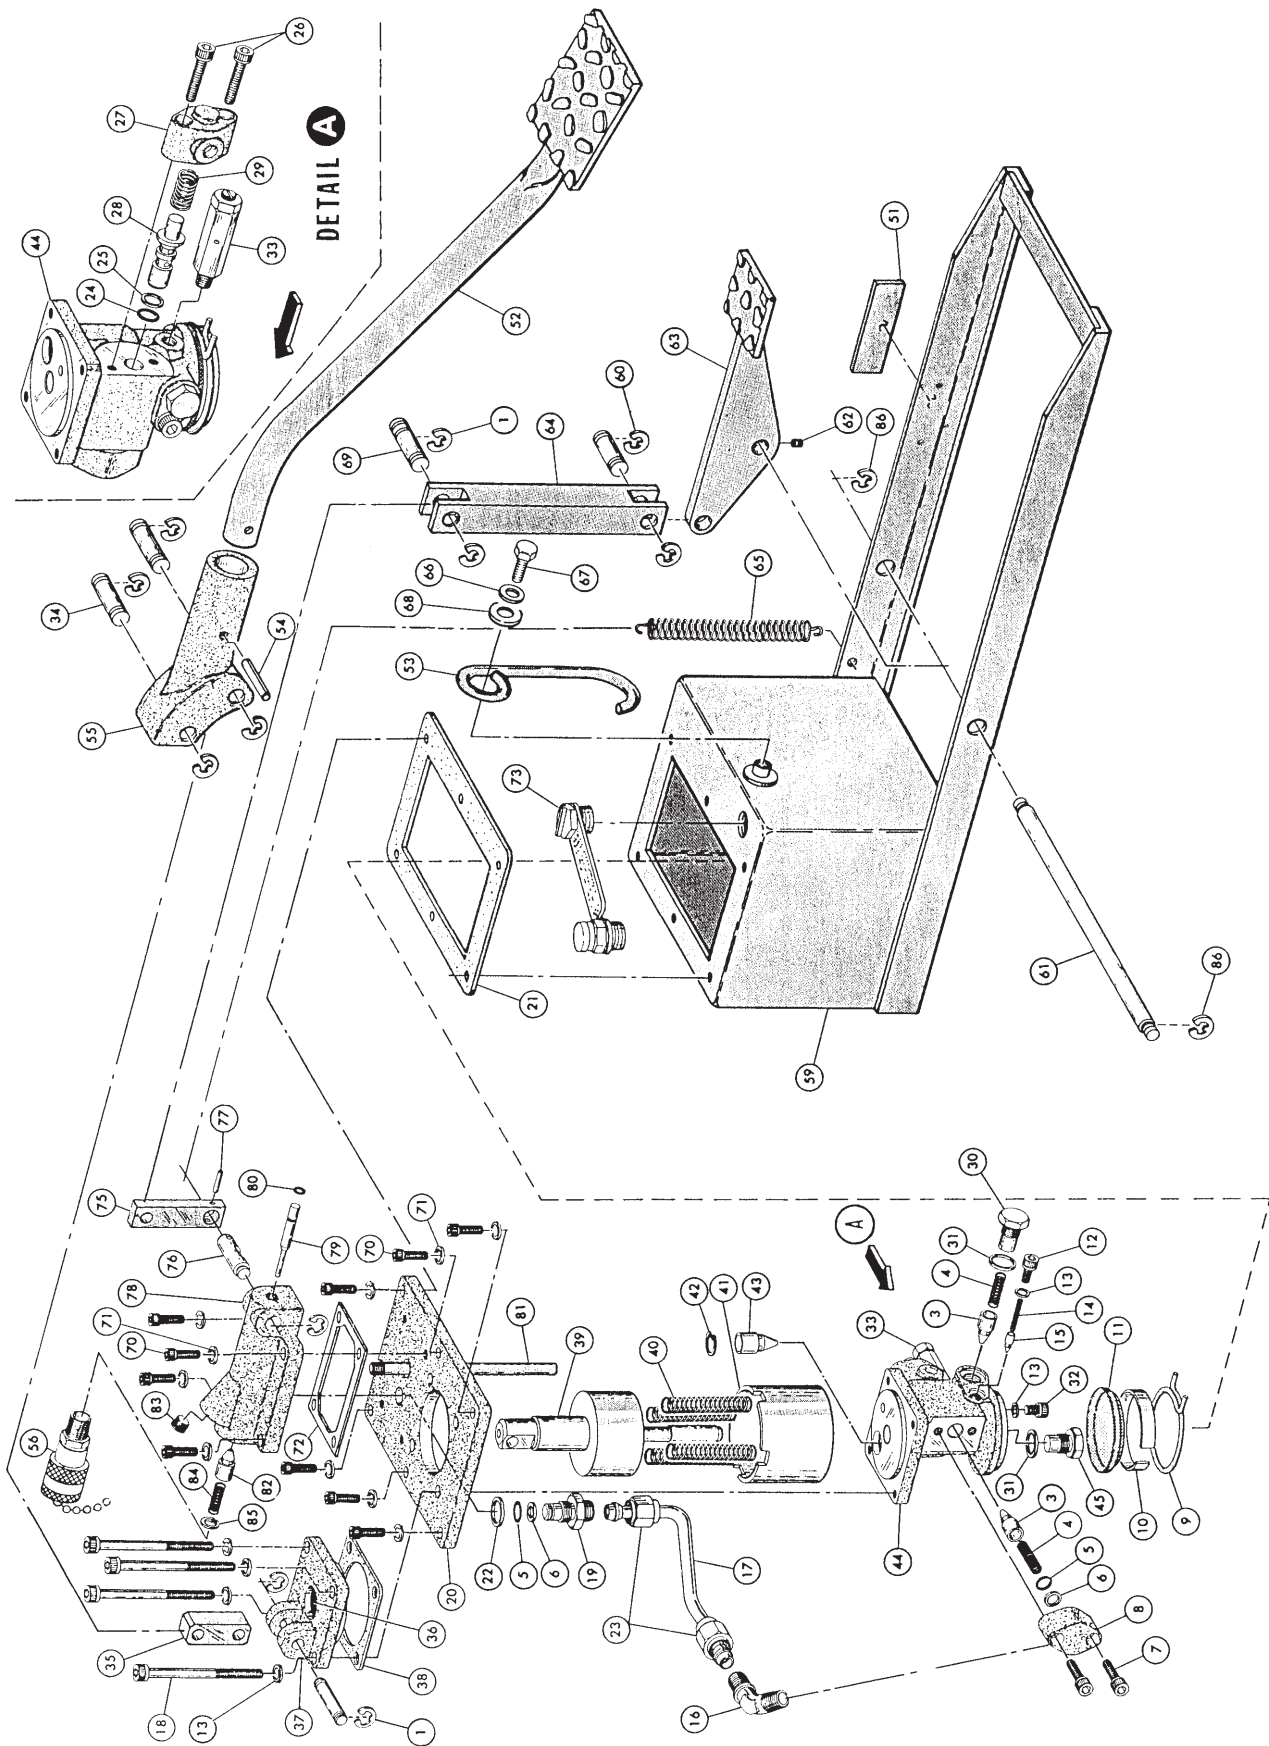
Parts List and Exploded View for Foot Pump Assembly No. 69325-3 (Sheet 3 of 3)
